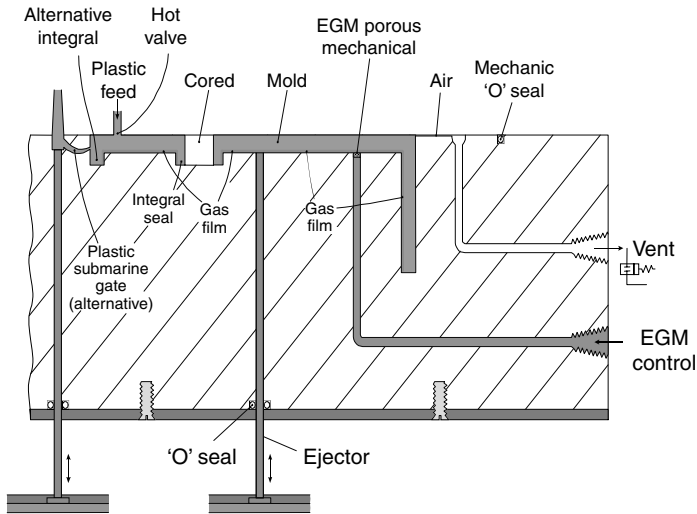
External gas molding tool details. (Courtesy of Cinpres Gas Injection Ltd.)
